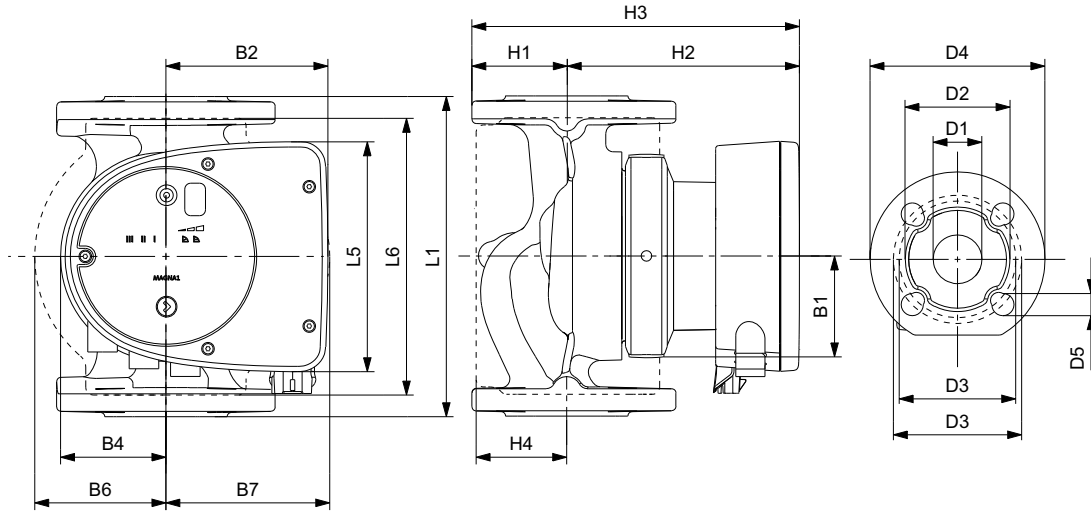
Single-head pump dimensions, plug-connected versions, flanged version
